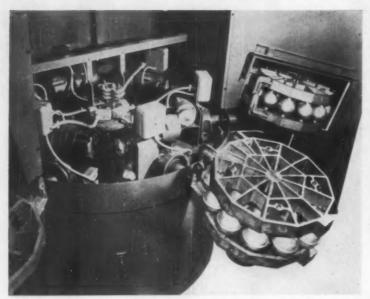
Production rotocast machine. (Photo, Akron Presform Mold Co.)
